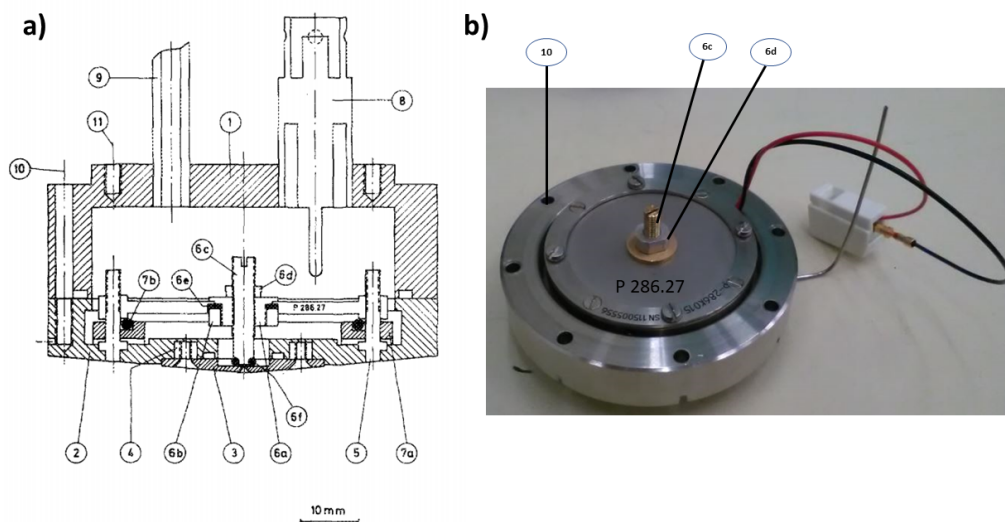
a) Profile view: Assembly drawing of the piezoelectric valve from reference [84]. (1) Valve body; (2) front plate; (3) nozzle plate; (4) threaded piece of tubing (mounting hole for nozzle plate), welded into the front plate; the total number of mounting holes is four; (5) holding the rod for disk translator; a total of four of these rods are welded into the front plate at equal intervals on a circle of 45.0 mm diameter; (6a) vertical adjustment nut for plunger; (6b) plastic nut; (6c) plunger (with slit for screwdriver on top); (6d) lock-nut; (6e) Viton gasket (0.7 mm thick); (6f) sealing o-ring; inner diameter: 1.5 mm, width: 1.5 mm; (7a) ring supporting the disk translator; (7b) o-ring; inner diameter 38.0 mm, width 2.0 mm; 8: coaxial feed through with MHV connector (Ceramseal); (9) gas inlet; 10: hole for M3 screw drawn 22.5° out of true position; a total of eight holes are equally spaced on a circle of 62.0 mm diameter; 11: mounting hole for valve (M3) (four holes). For clarity, parts (4), (5), (6), (8), (9) and the disk translator are not hatched. Parts (1), (2), (3), (4), (5), (7a) and (9) are made of stainless steel, parts (6a), (6c), and (6d) of aluminium;
